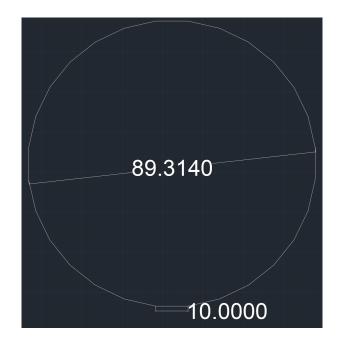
CAD Representation of 28 Sided Character Gear (measurements in mm)
